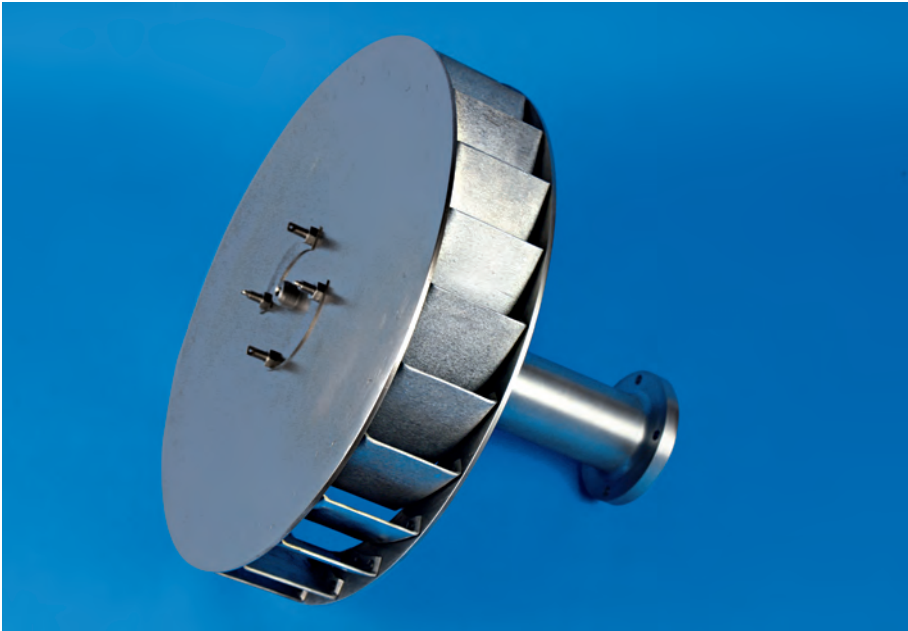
Machined and formed TZM and Molybdenum components assembled into a rotor.
